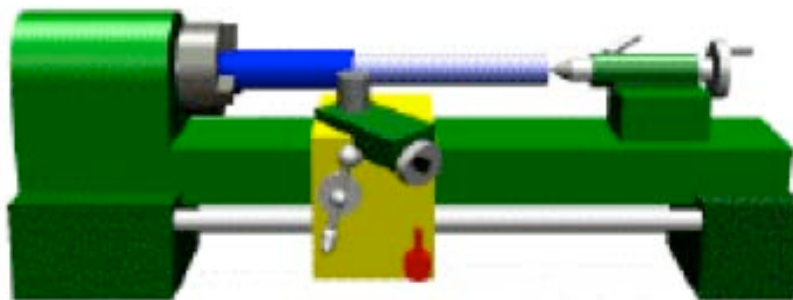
A simple schematic of a LATHE set up to reduce the diameter of a cylindrical workpiece. <http://www.mini-lathe.com> [December 2009].
